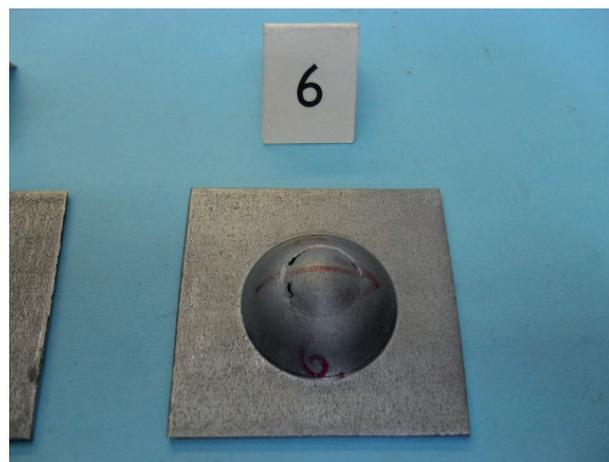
Crack of steel 11 321, after DRECE 2x180°
